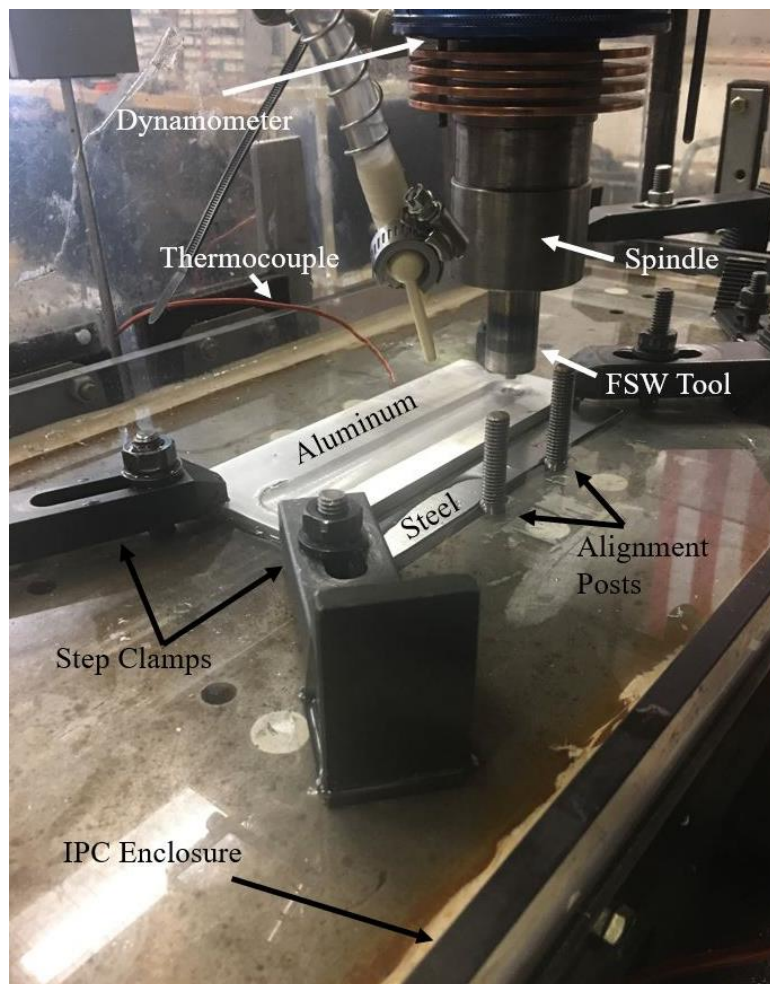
Water cooled weld that shows the experimental set up for the IPC welds
